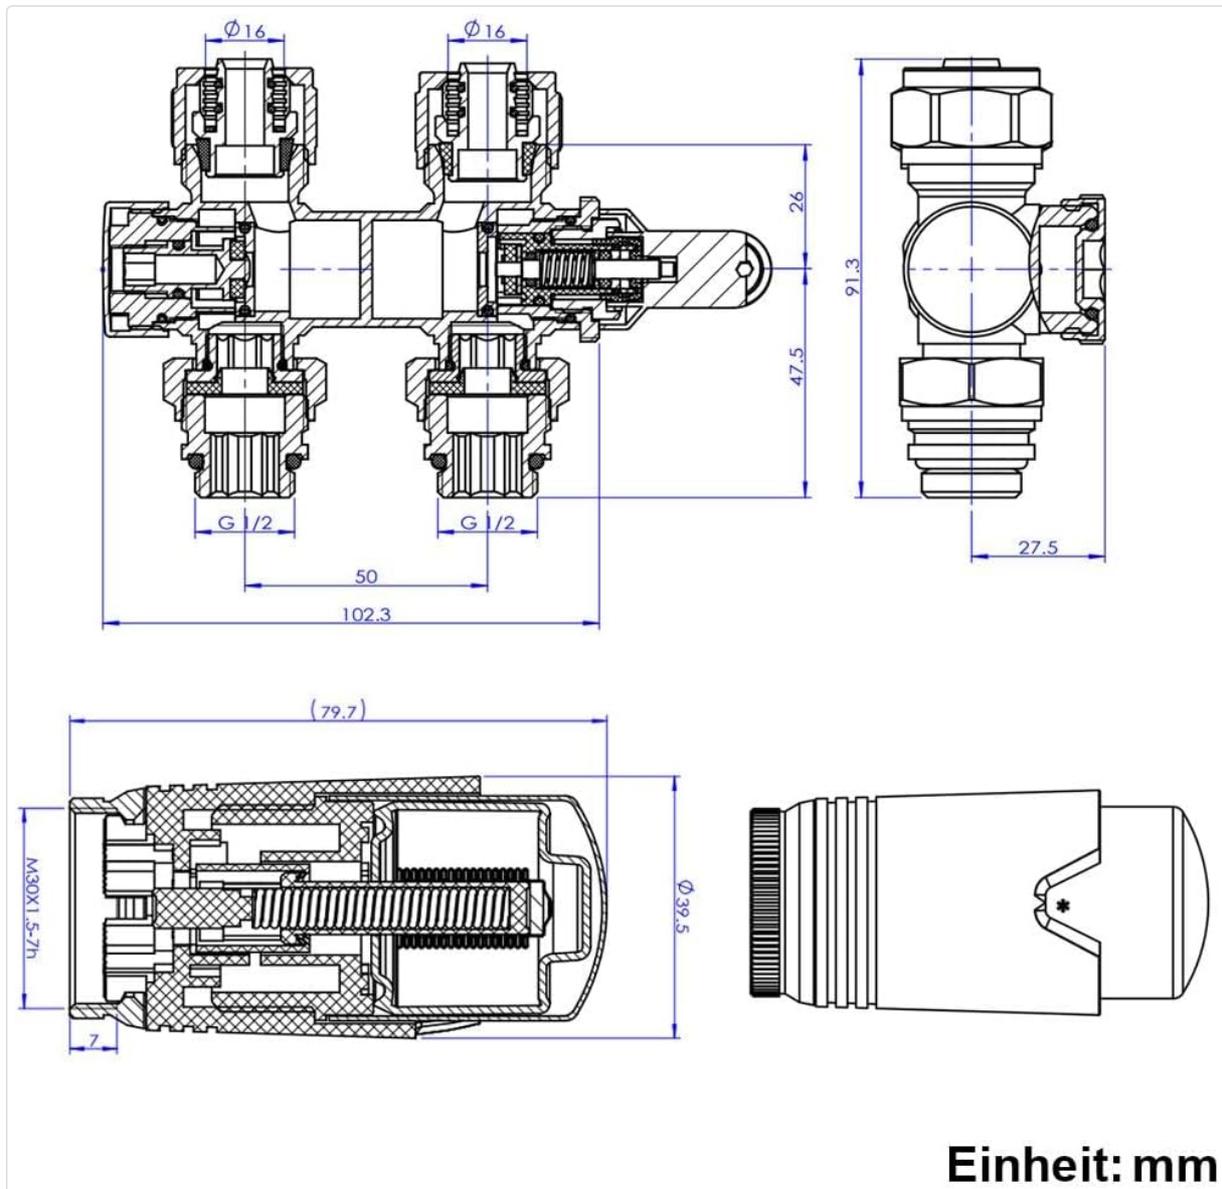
Technical drawing illustrating the dimensions and internal structure of the valve block and thermostat head (Unit: mm).
